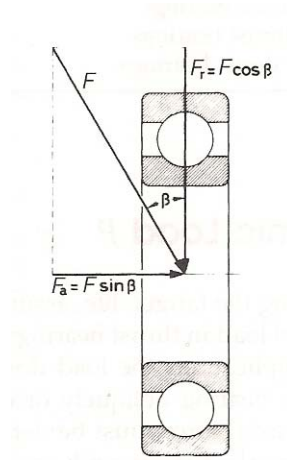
Combined loading of a radial deep-groove ball bearing [3]
